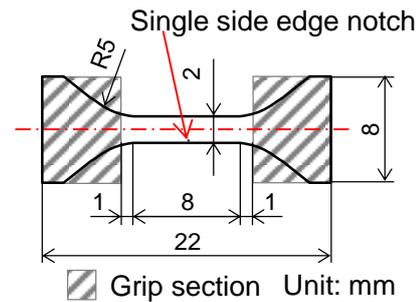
Shape and dimensions of freestanding film specimens used in fatigue crack propagation experiments.
